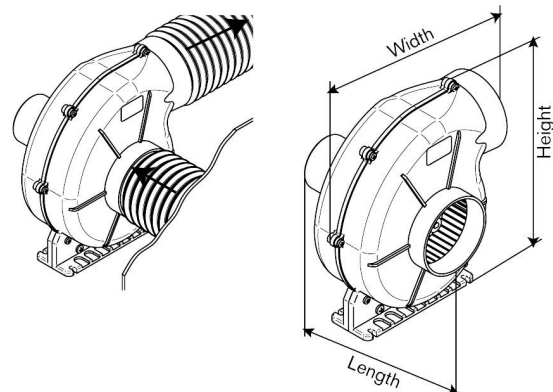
SPX Johnson Blower- Flange and Flex Mount [34]
